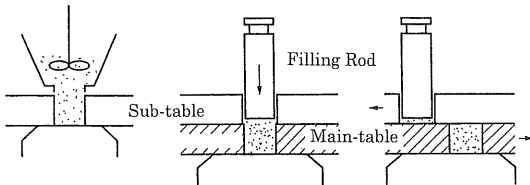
Schematic Views Showing Filling Steps of Wet Powder
